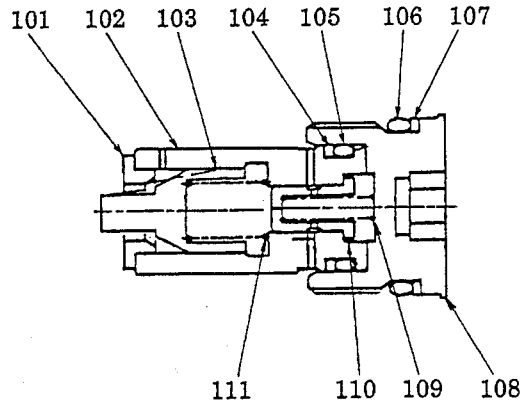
Detail of by-pass valve assy (swing shockless valve)
